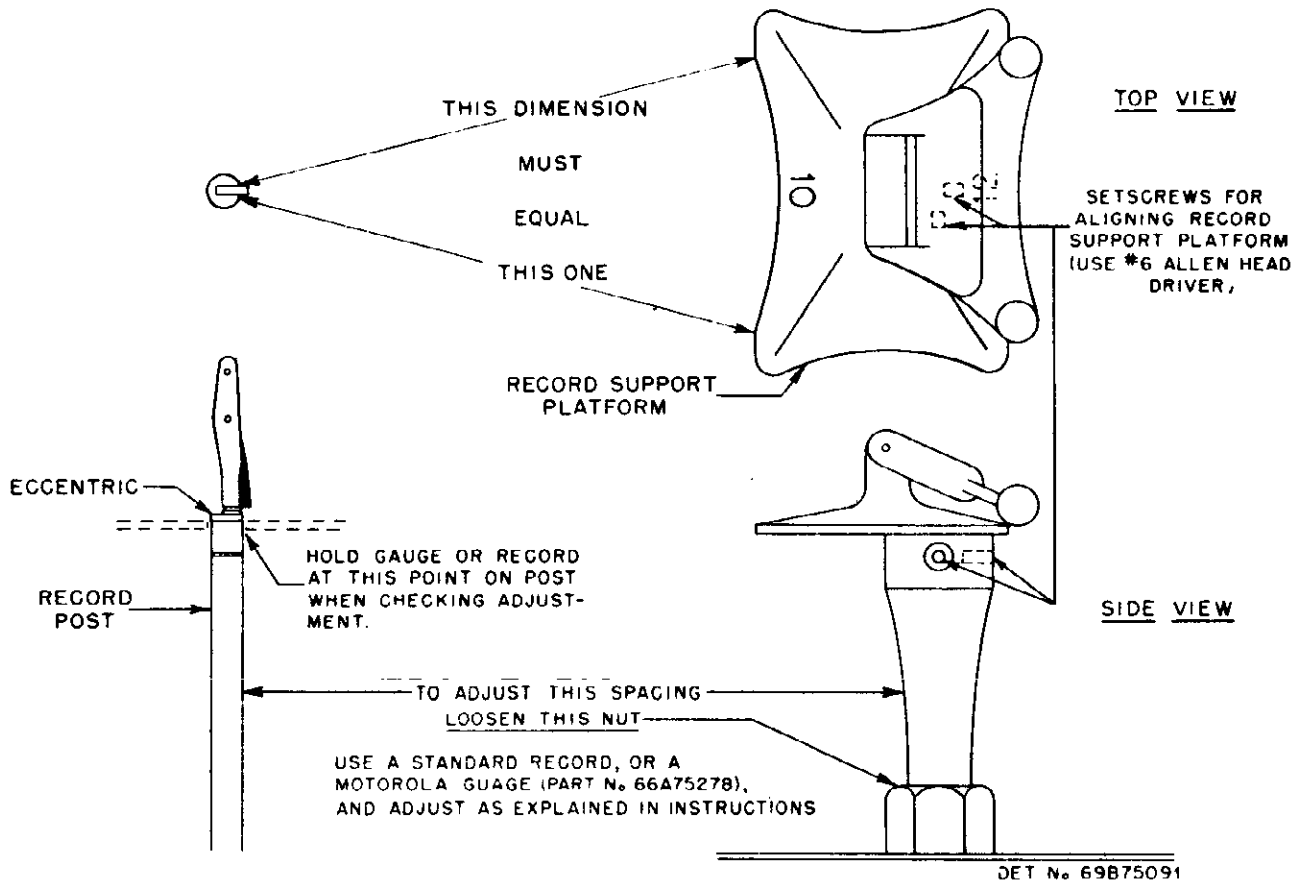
RECORD SUPPORT PLATFORM ADJUSTMENT DETAIL
